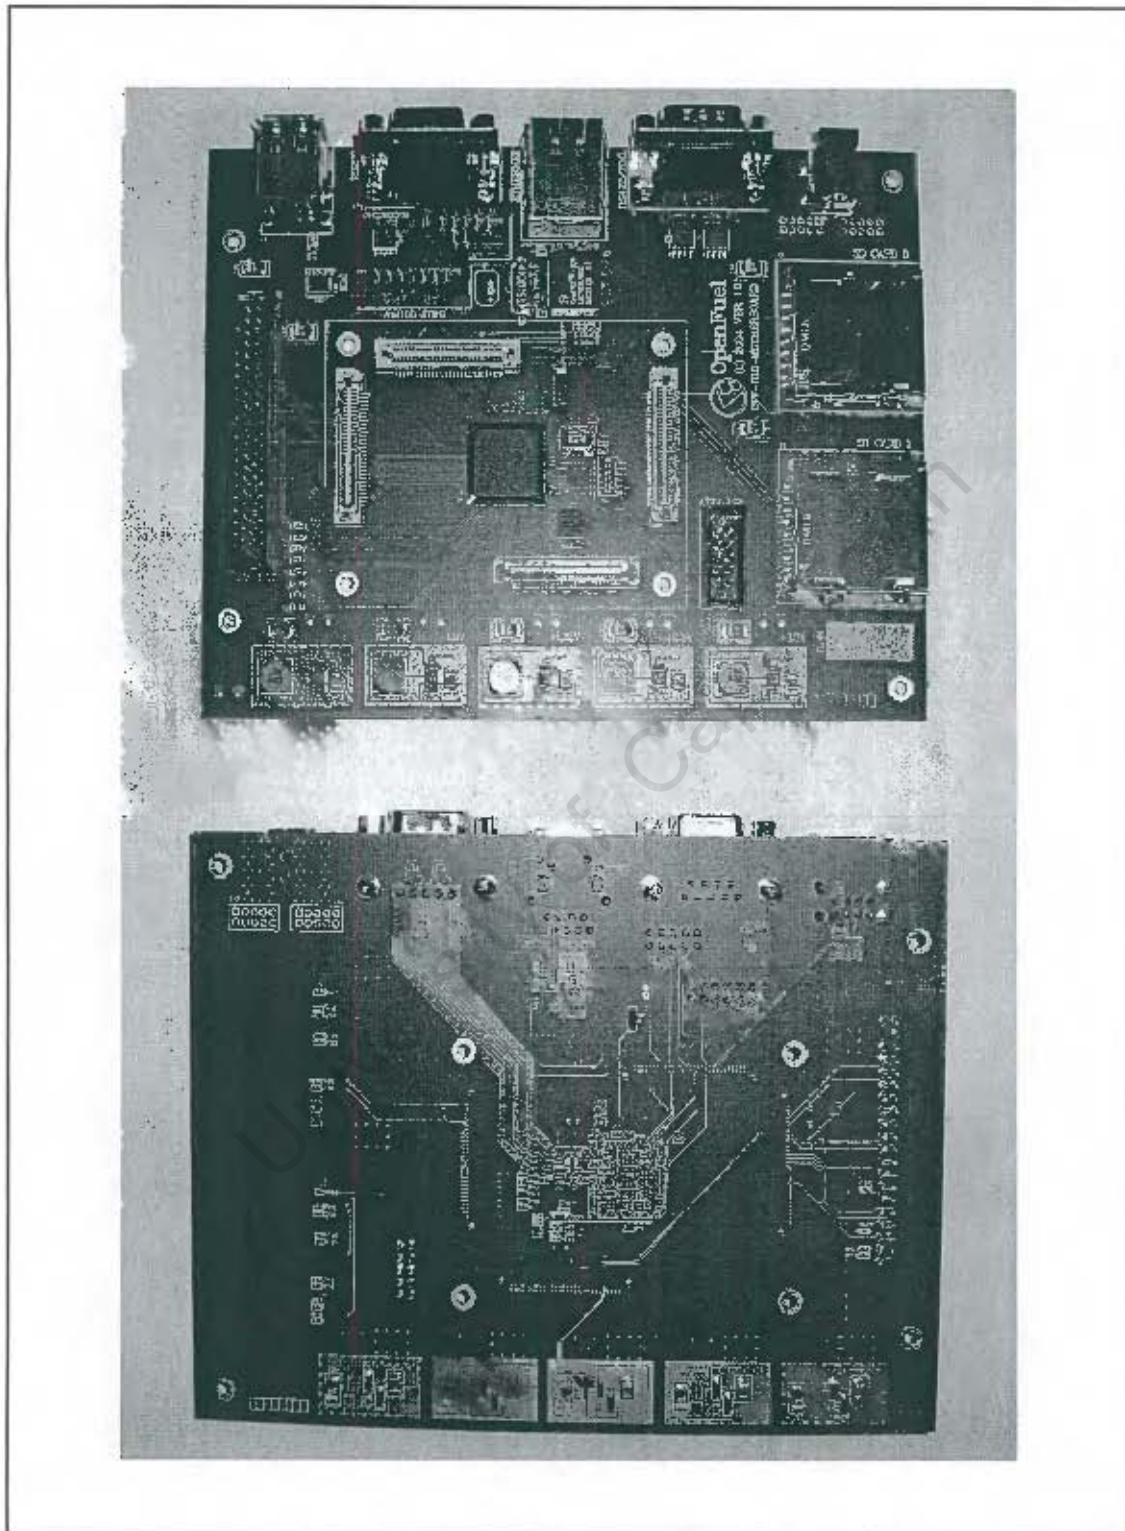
RUI Motherboard Top and Bottom Populated PCB View
